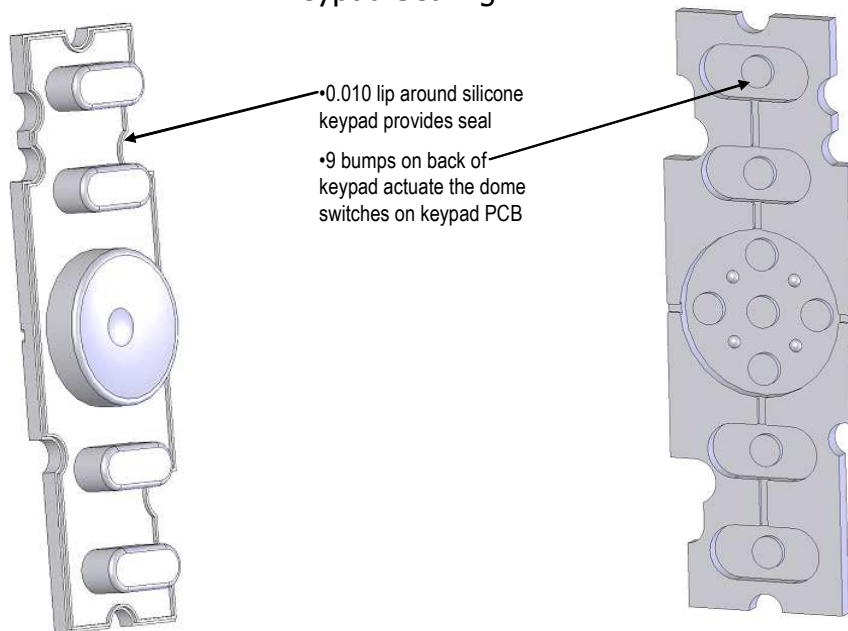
Keypad printed circuit board assembly features for sealing for Spiral 3.
